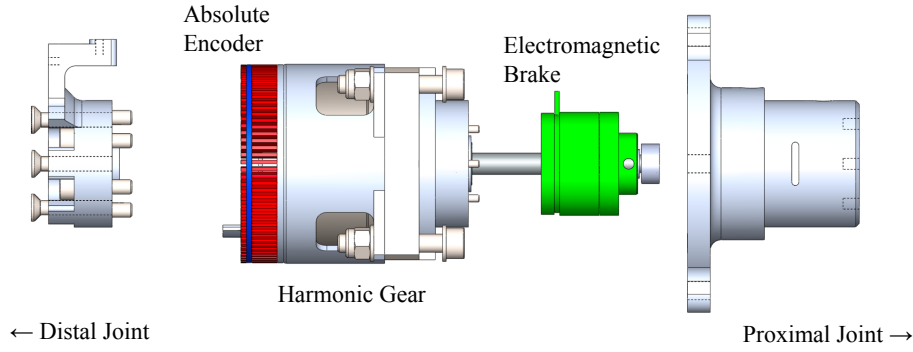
Exploded view of each rotational joint inside the Hamlyn Lightweight Robot Arm.
